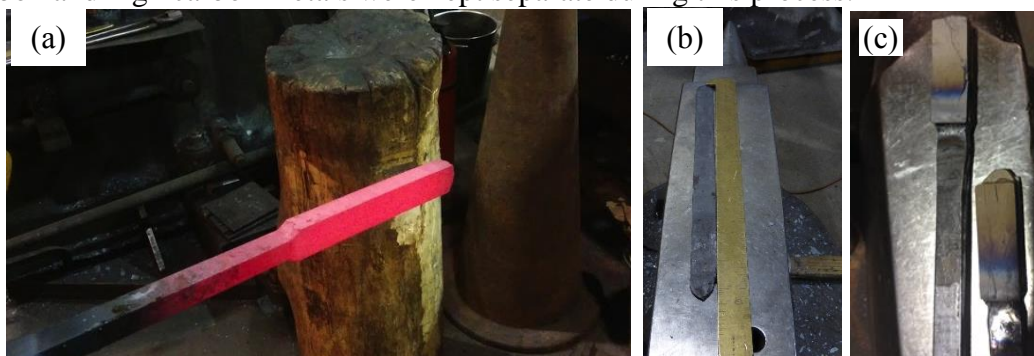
a) Billet package after forge welding b) drawn out ingot package c) and cut and re-welded billet for further laminating.
